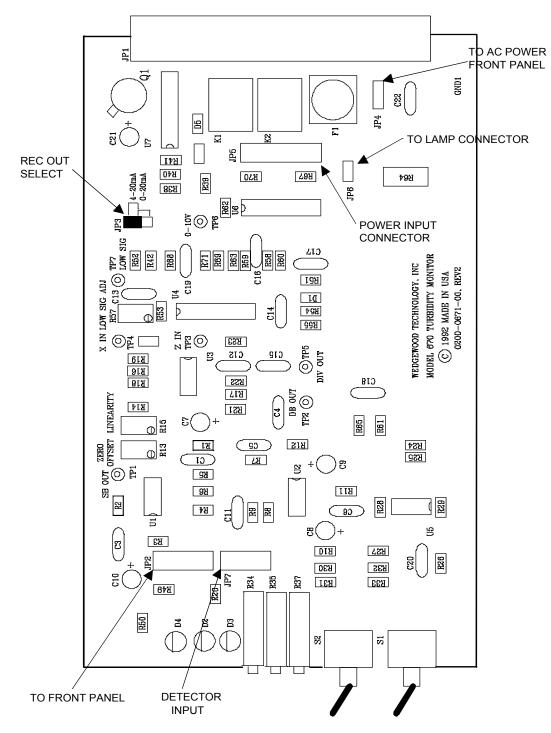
Model OUM670 Main PCB Component and Control Location
